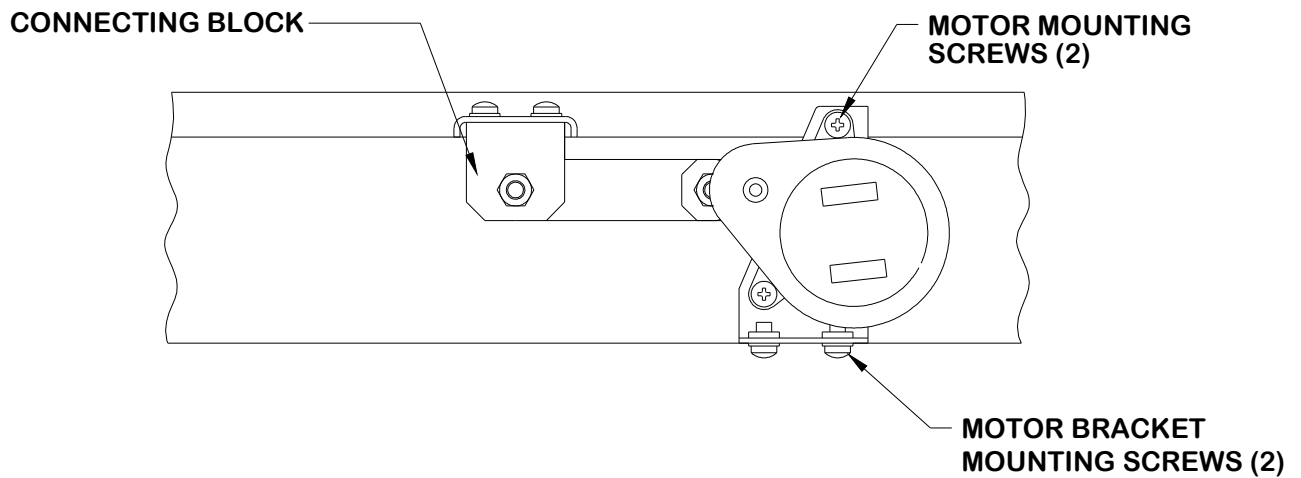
E illustrates the following motor removal procedure. The motor and crank mechanism must be removed together from the bucky before further disassembly can be done. First, disconnect the motor cable from the circuit board. Next, remove the two connecting block mounting screws and the two motor mounting screws. Lift the motor out of the enclosure. The crank mechanism can then be removed from the motor by loosening the two motor crank set screws.
